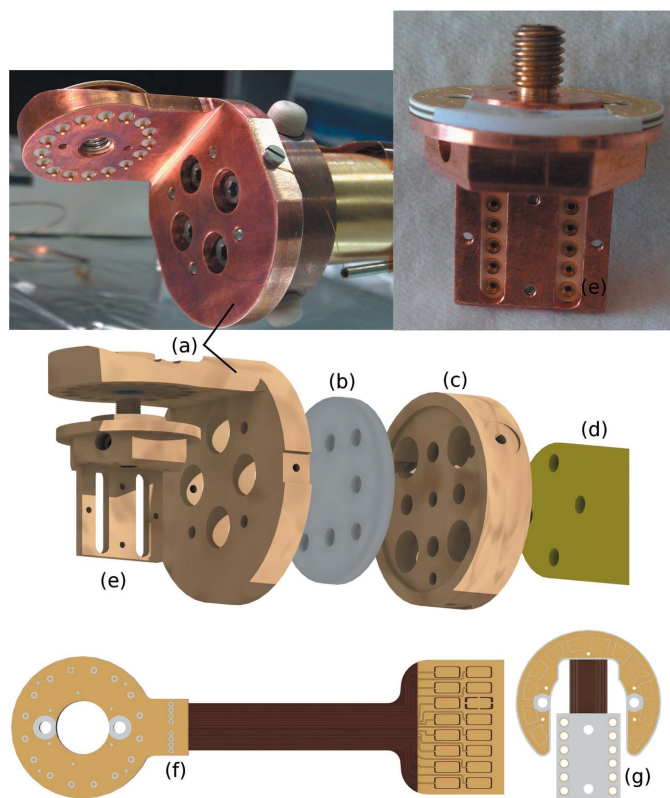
Immediate sample environment. Top: photographs of the insert (left) and the sample holder (right). The middle view is an expanded view of the homemade head where the main parts are without screws or PCB: (a) sample holder interface; (b) sapphire disc; (c) interface between the Janis cryostat and the sapphire disc; (d) the commercial cryostat from Janis; (e) the sample holder. Bottom: flat view of (f) the top PCB with Kapton flex and (g) the sample holder PCB.
